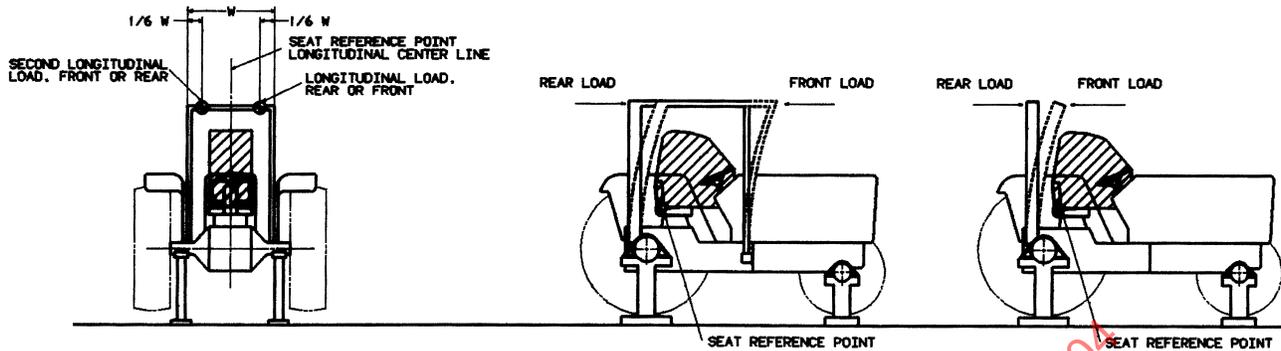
A—TYPICAL REAR (FRONT) LOAD APPLICATION
